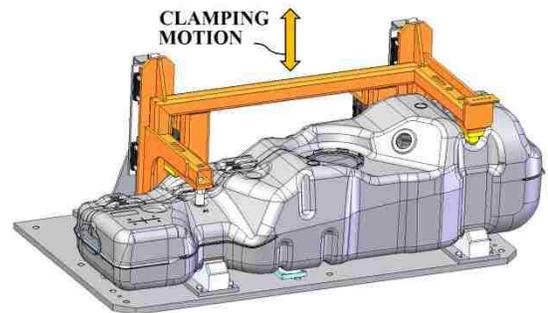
Fuel Tank Clamping (Courtesy SPM Automation (Canada) Inc.)
